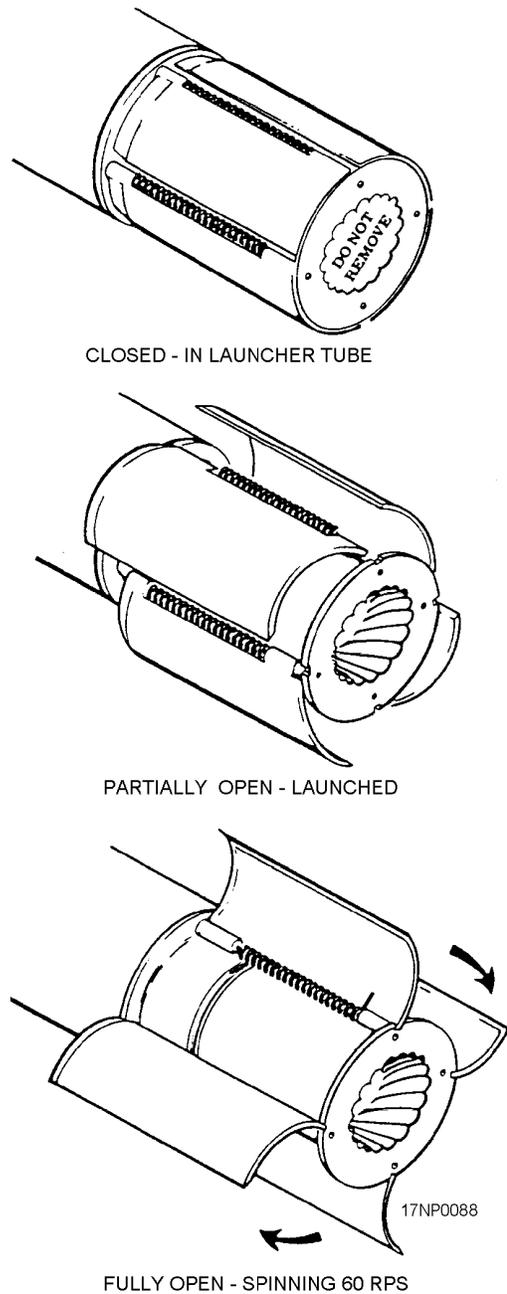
Mk 71 Mods motor, nozzle, and fin assembly.
